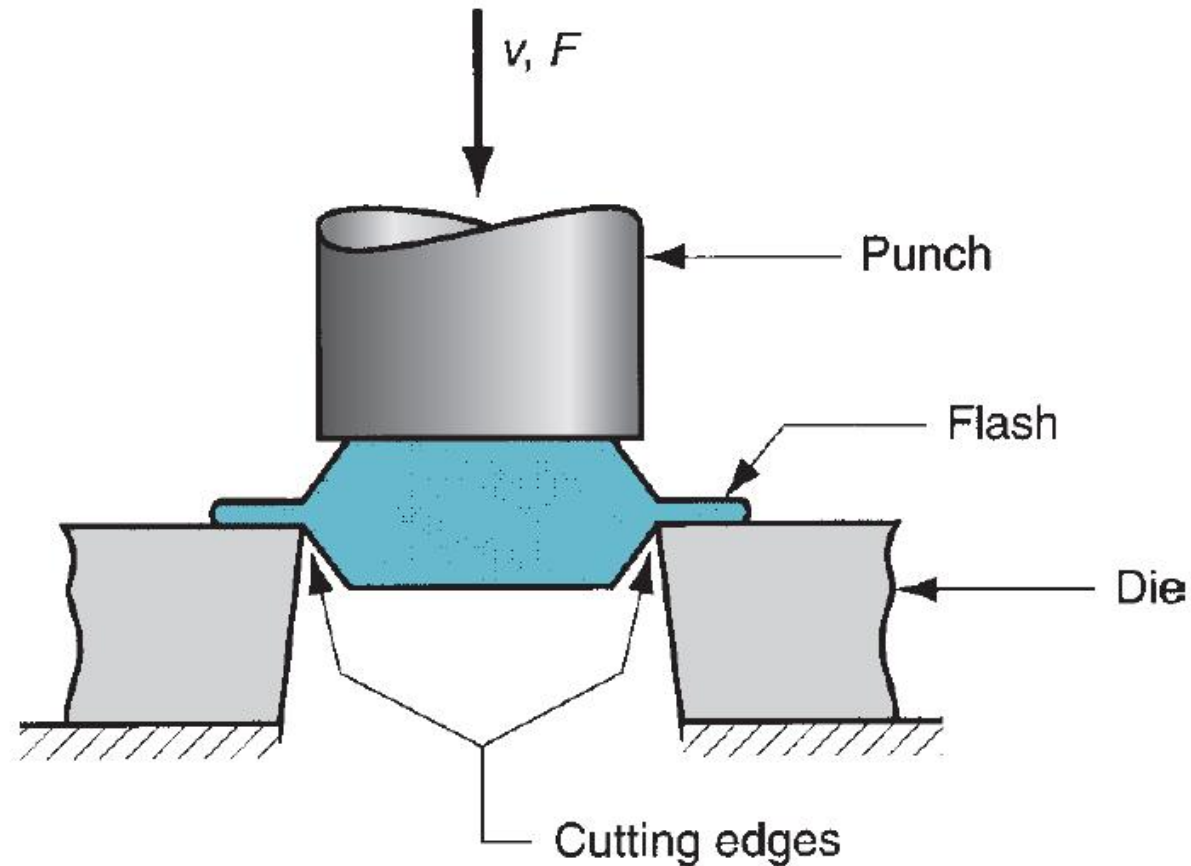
Trimming operation (shearing process) to remove the flash after impression-die forging.
